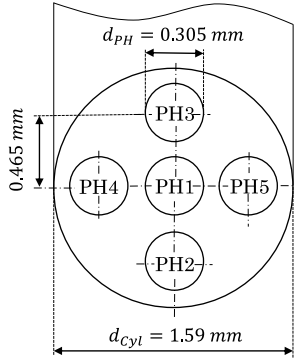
FRONTAL VIEW - DIMENSIONS AND PROBE HOLE NOMENCLATURE
